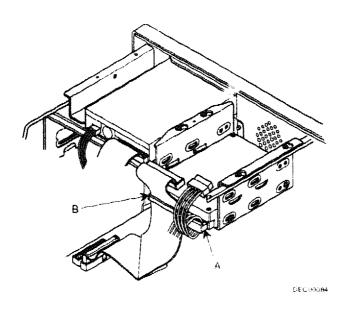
Typical 31/2-Inch Hard Disk Drive Rear Connections
